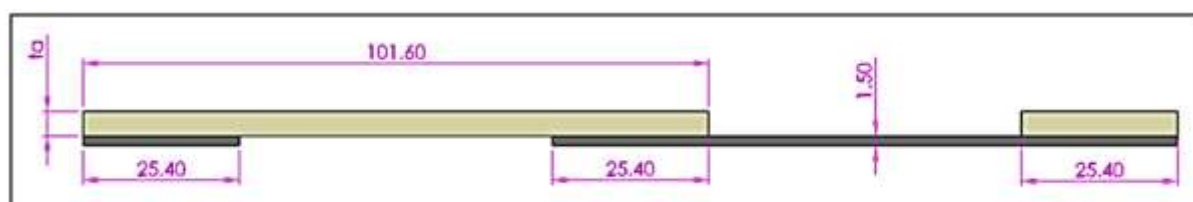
Specimen configuration of the co-cured single-lap joints. (*not to scale, dimensions in mm*)
